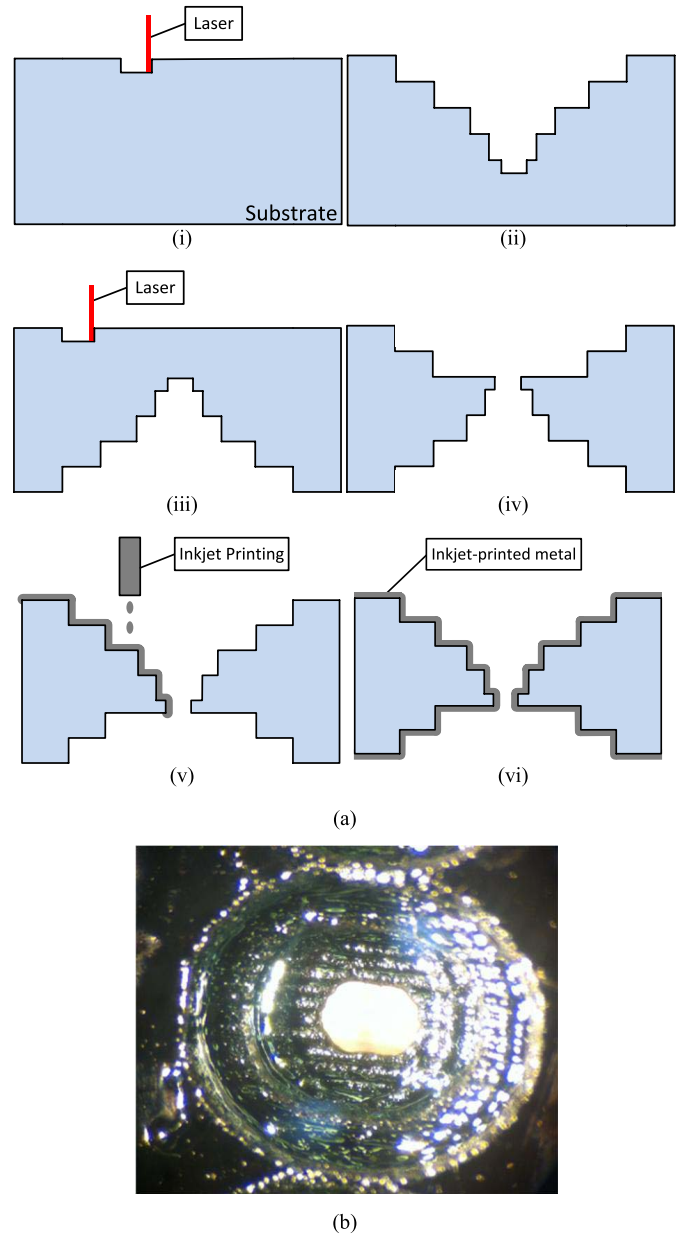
(a) Stepped-via hole fabrication process. (a-i) Laser drilling (top). (a-ii) Drilled via hole (top). (a-iii) Laser drilling (bottom). (a-iv) Drilled-via hole (top and bottom). (a-v) Inkjet printing and sintering. (a-vi) Fabricated stepped-via hole. (b) Fabricated stepped-via hole (magnification ratio: 10 $\times$ ).
